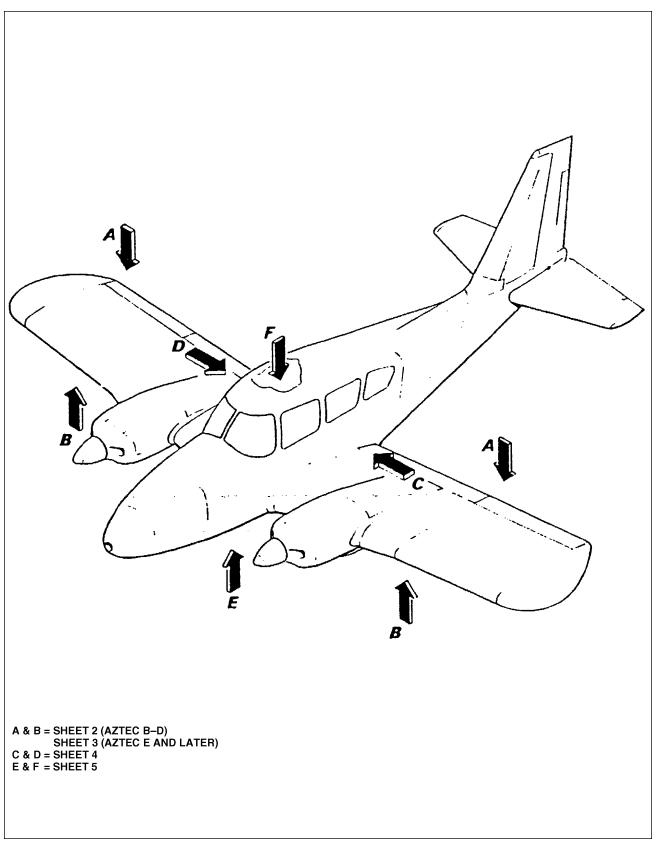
Access Plates and Panels PA-23-250 (six place) (Sheet 1 of 5)
